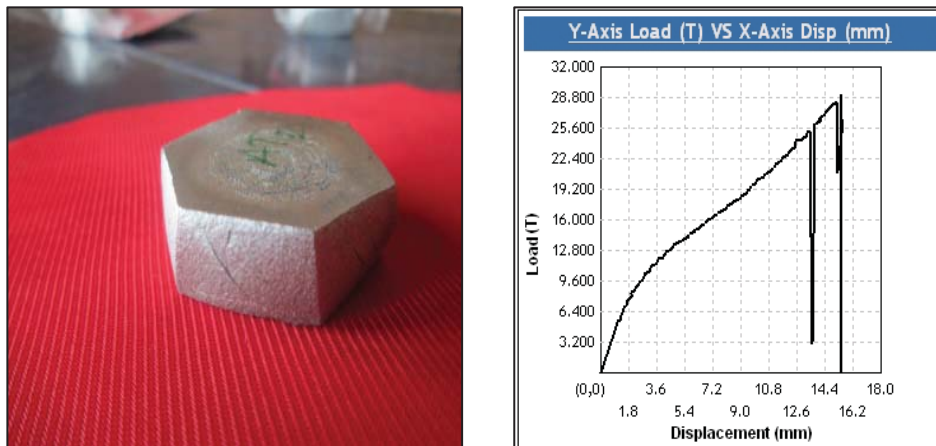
Deformed Transverse Specimen of AA2219 Load applied with oil
